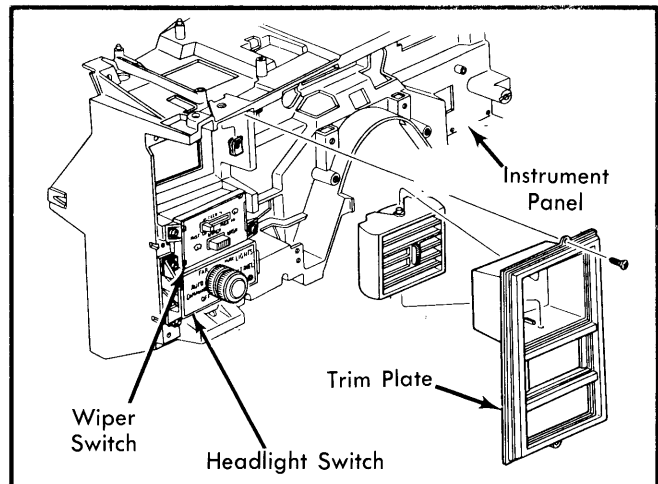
Left Trim Plate Removal (Eldorado and Seville)
